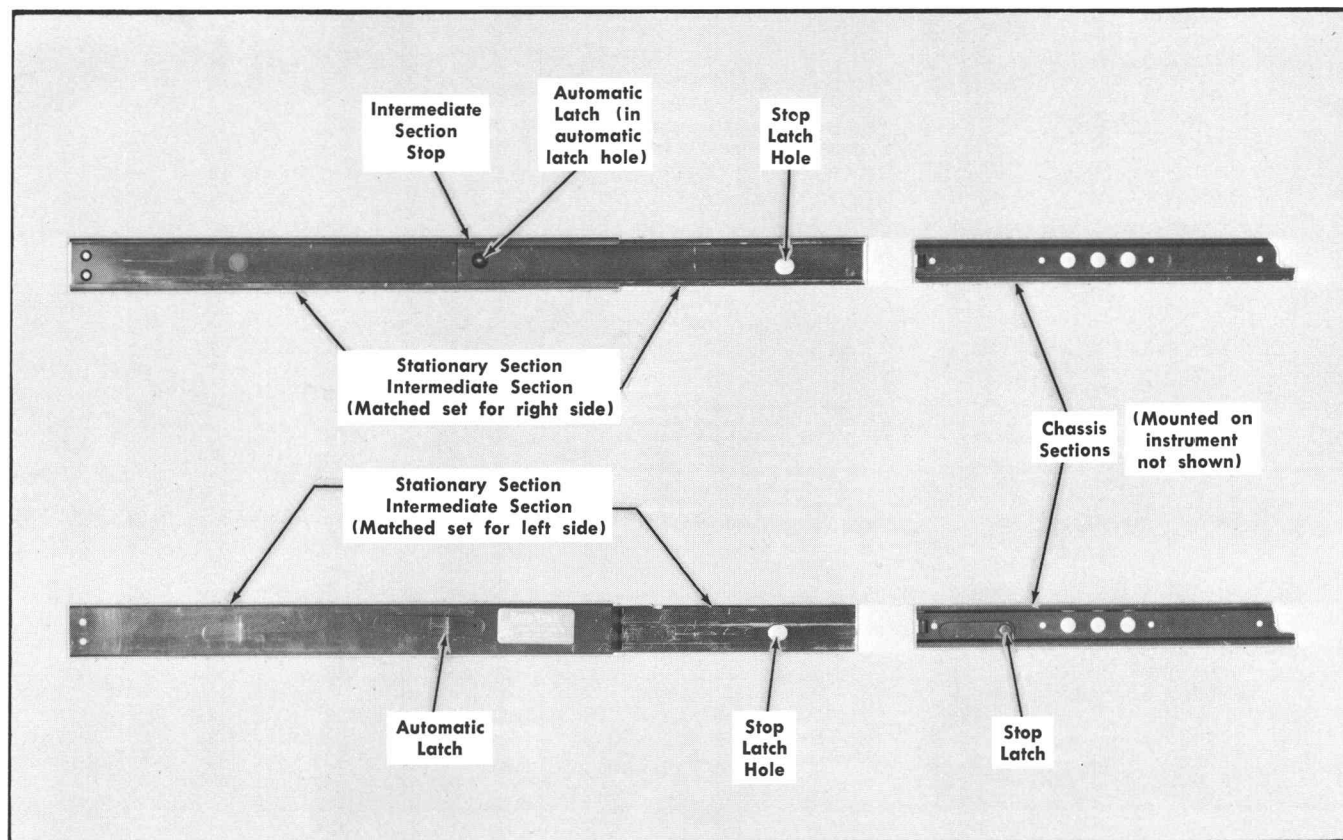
Illustrations showing the 1 1/4-inch wide slide-out track assemblies.
